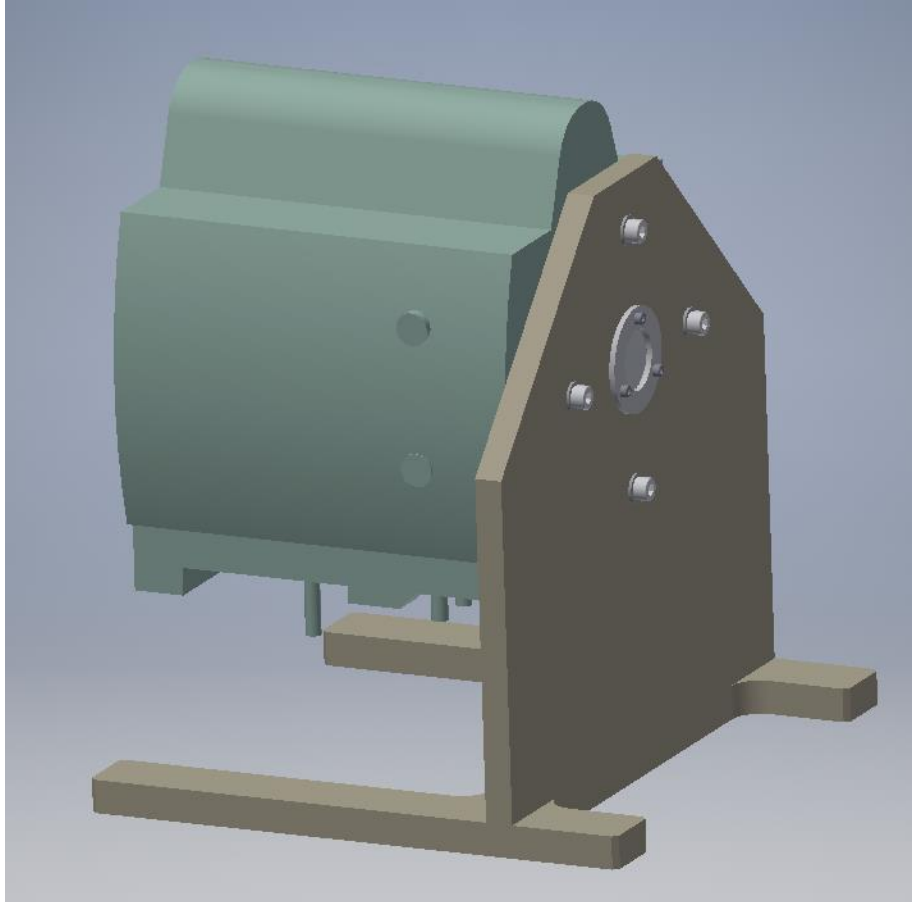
The cartoon shows the simple camera mount (with Andor EMCCD camera fitted) which is used when a thermal enclosure is not necessary. The base-plate and upright plate of the mount are first screwed together and the filter is inserted into the face-plate, held there by the clamp ring. The camera is then fitted using four mounting screws. When used without a thermal enclosure it is not necessary to fit cooling pipes and so the only connections to the camera required are the camera data/control cable and the Peltier power supply cable (both not shown here).
